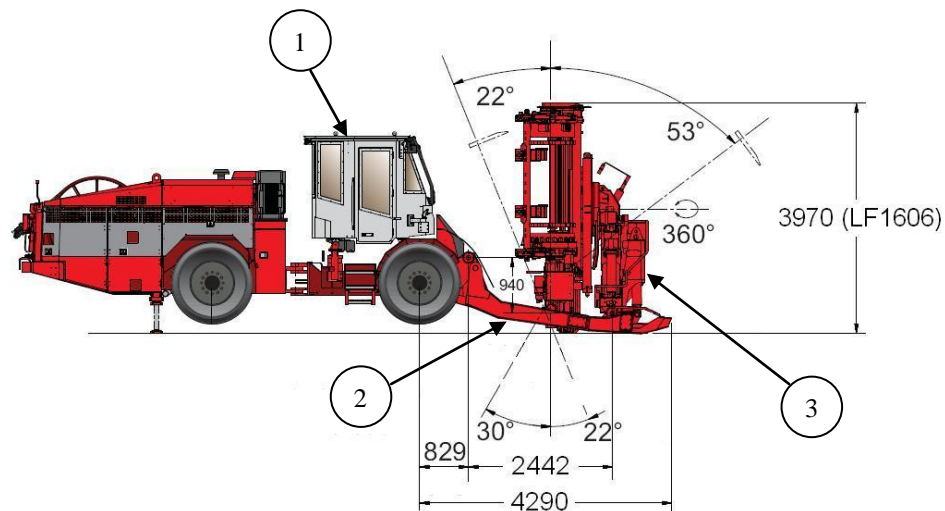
A side view of DL421-15C while drilling. Number 1 points to the cabin, 2 to the front frame and 3 to the boom. (Figure modified from: Technical Specification, DL421-15C; Windchill)
